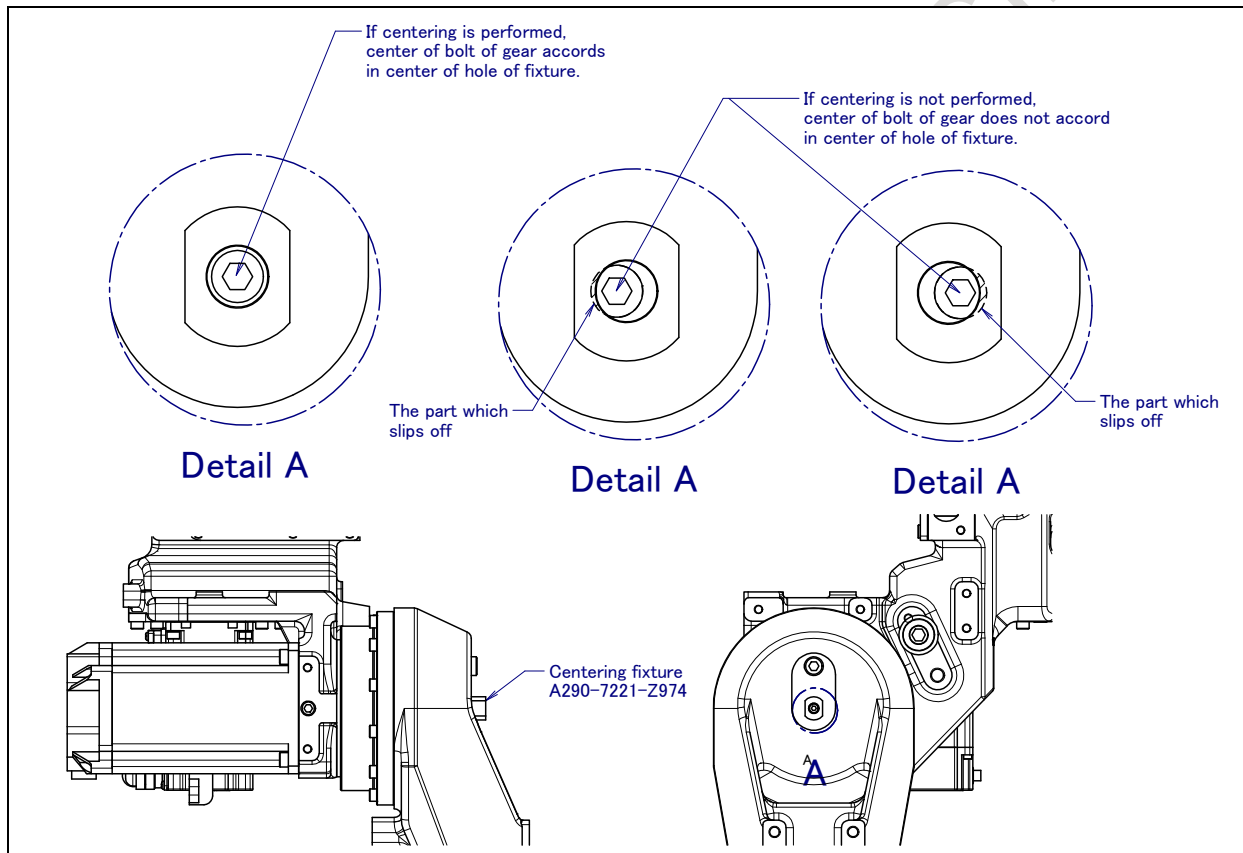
(g) Confirming the adhering of J3-axis motor
